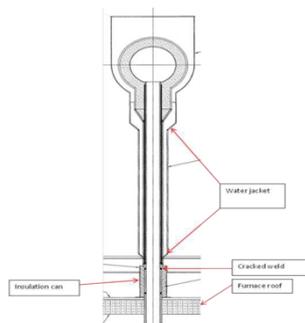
a Top section of the modified riser design illustrating the location of subsequent failures [12]
